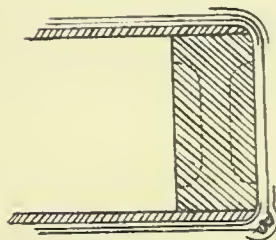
METHOD OF ATTACHING FABRIC TO REAR SPAR
